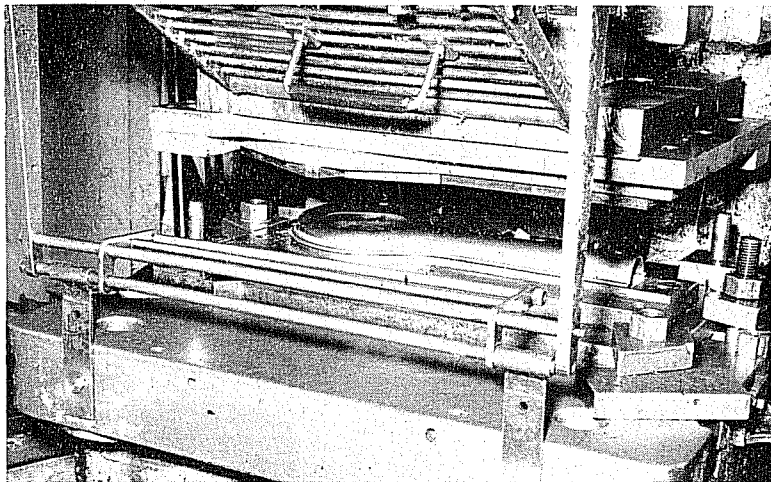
(left).—Fork leg pressings in press for closing over of flange after spotwelding
